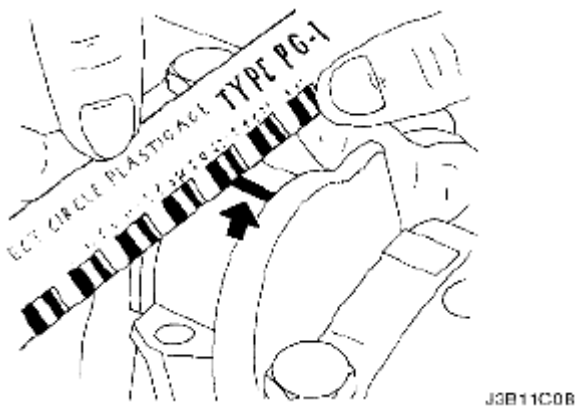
Locating Bearing Clearance For Permissible Tolerance Ranges
